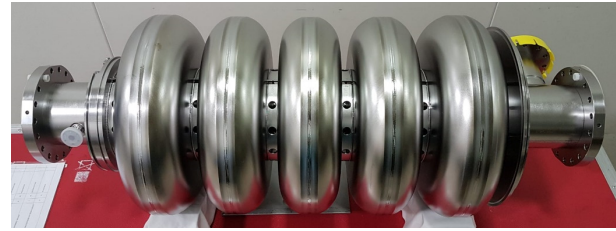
INFN B61_EZ_001 LB650 cavity for PIP-II after final electron-beam welding.
